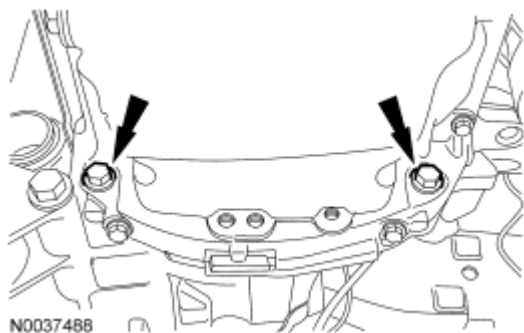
Locating Oil Pan-To-Bellhousing Bolts
